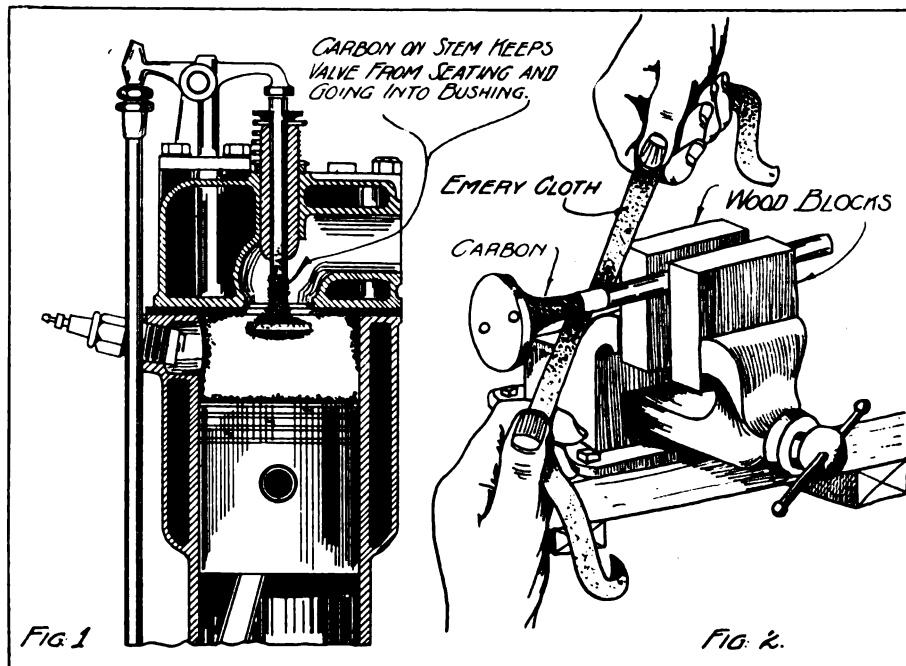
Result of Carbon Collecting on Valve Stems; Improper Seating of Valve Will Result. Fig. 2—Removing Carbon from Valve Stem Held in Vice, Using a Strip of Emery Cloth.
